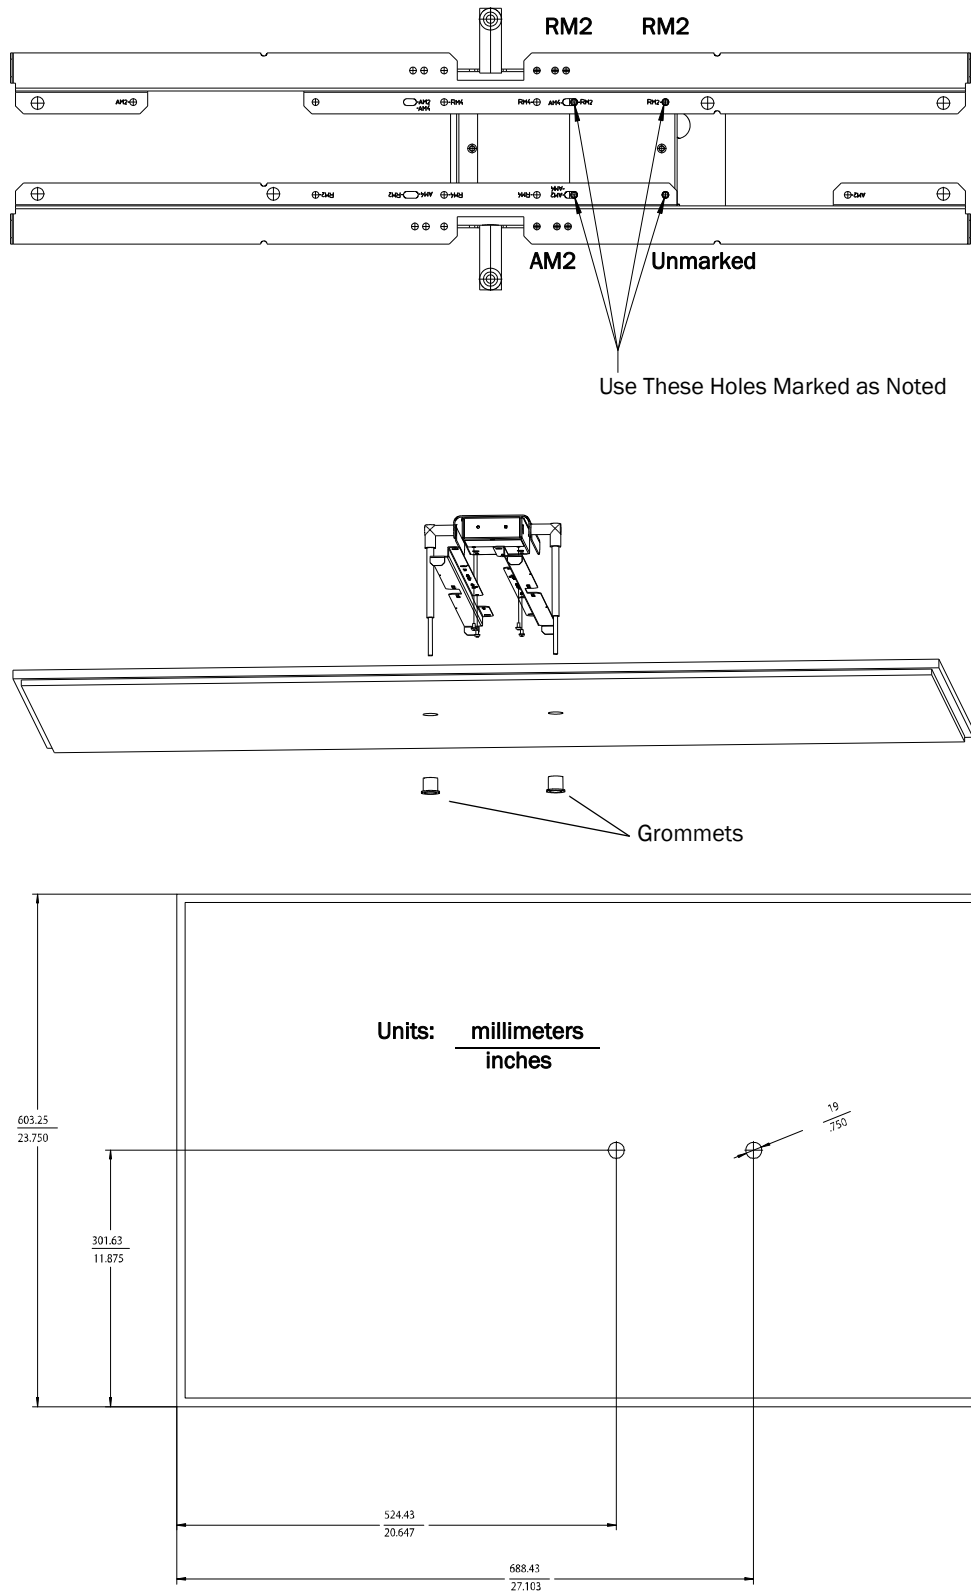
Possible Above the Ceiling Remote Antenna Mounting Position
